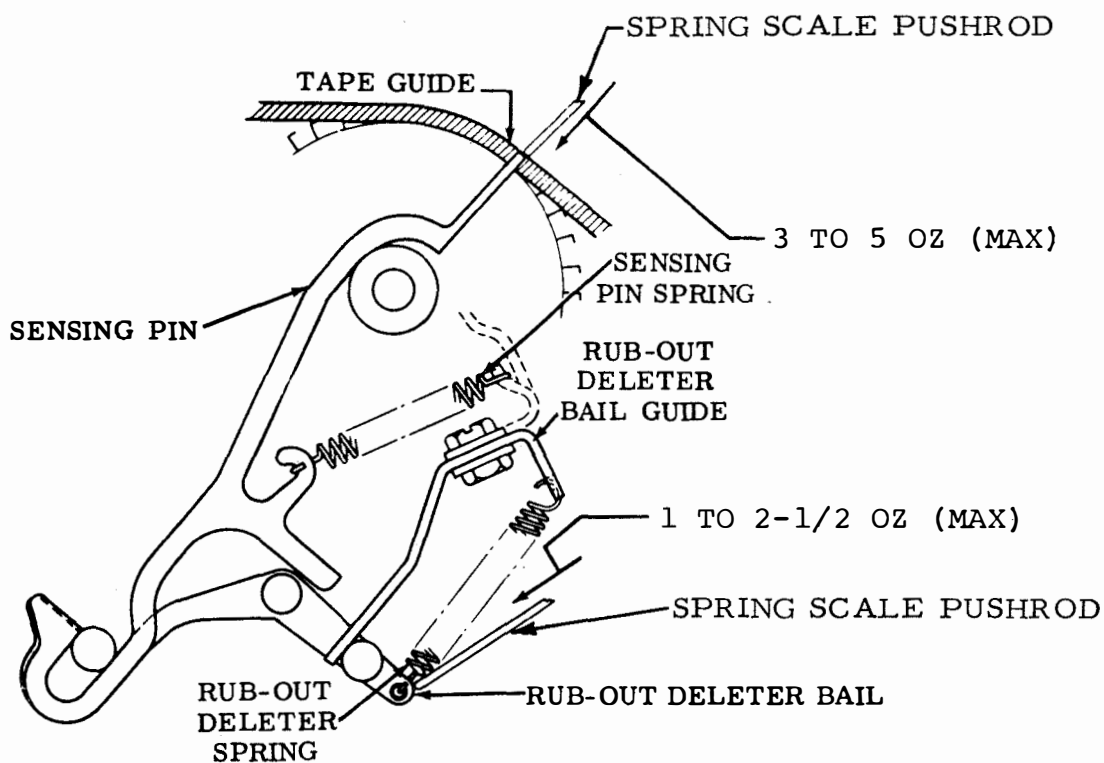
Sensing Pin Spring and Rub-Out Deleter Bail Spring, Front View
